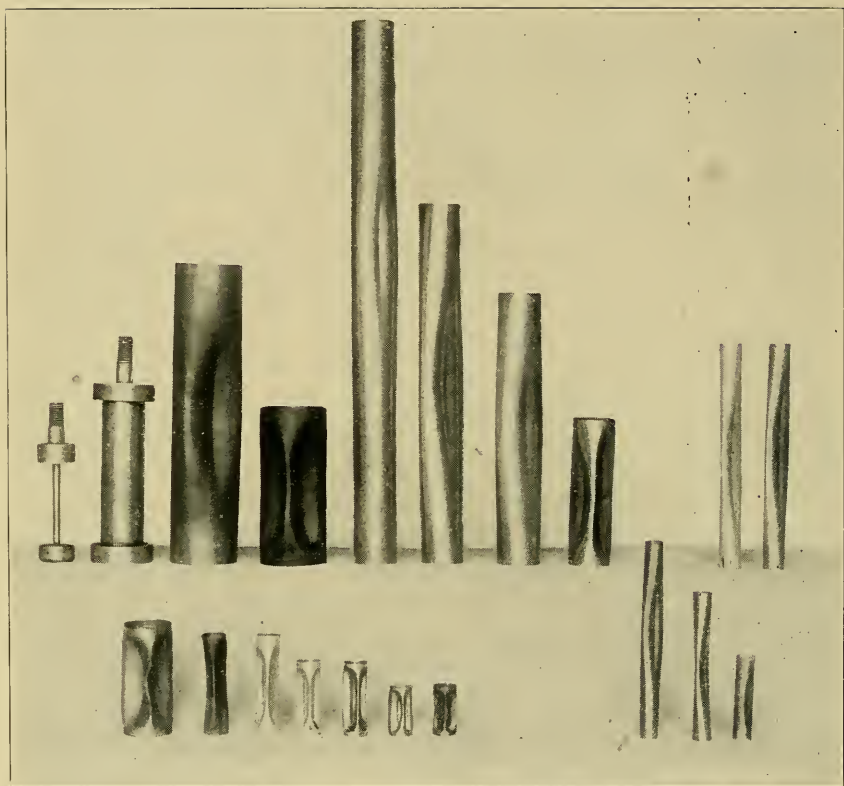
TUBES THAT HAVE BEEN COLLAPSED. ON THE LEFT THE MOUNTING ARRANGEMENT IS SHOWN. LONG TUBES COLLAPSE IN TWO LOBES, SHORTER TUBES INTO THREE LOBES, AND STILL SHORTER TUBES INTO FOUR LOBES
